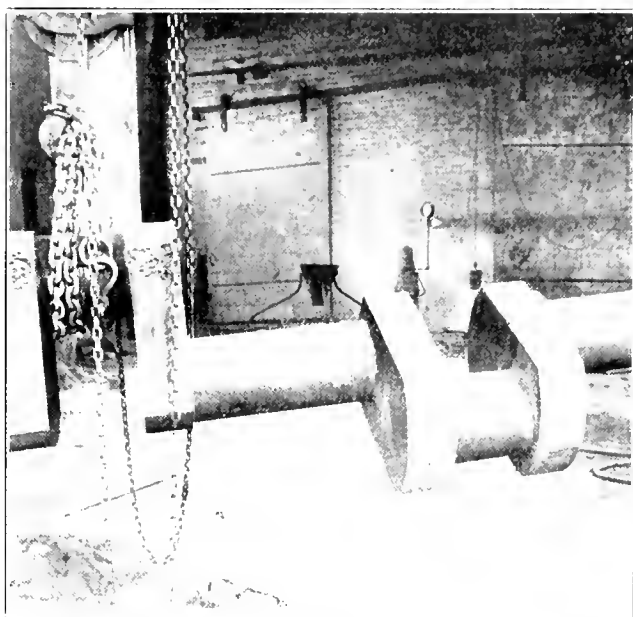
The Shaft after the Fractured Web (seen to the extreme right) had been welded
